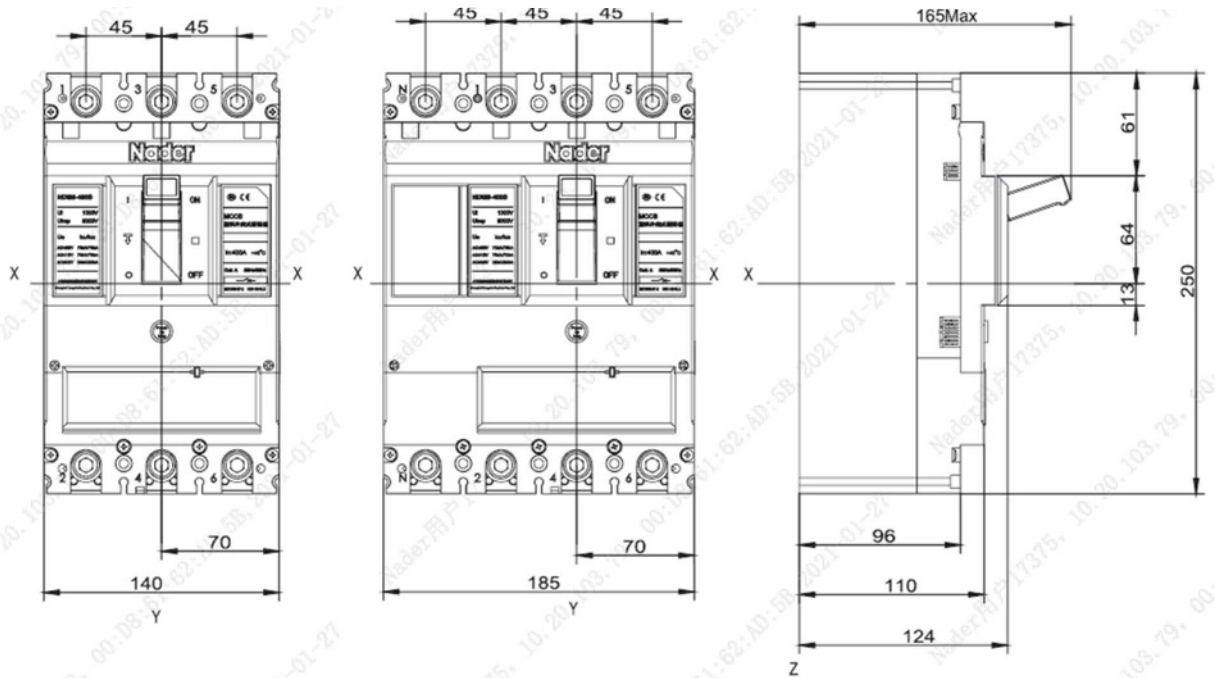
NDM5Z-400 outline dimensions of 3-pole and 4-pole front panel connection products
